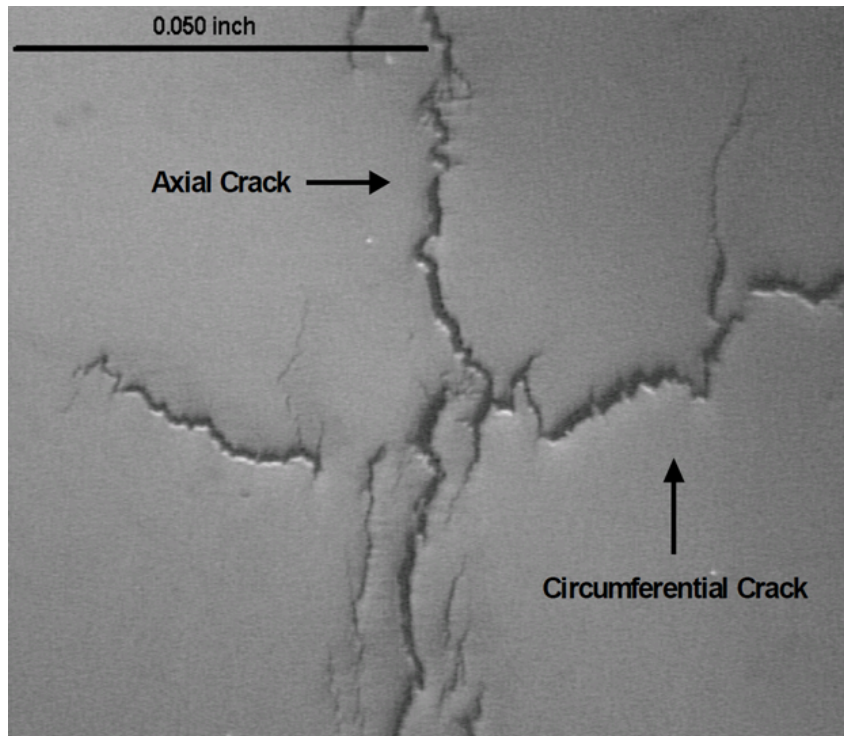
Crack morphology at the intersection of axial and circumferential cracks on the inside surface of the reactor pressure vessel outlet nozzle to piping dissimilar metal weld at Virgil C. Summer Nuclear Station, Unit 1
